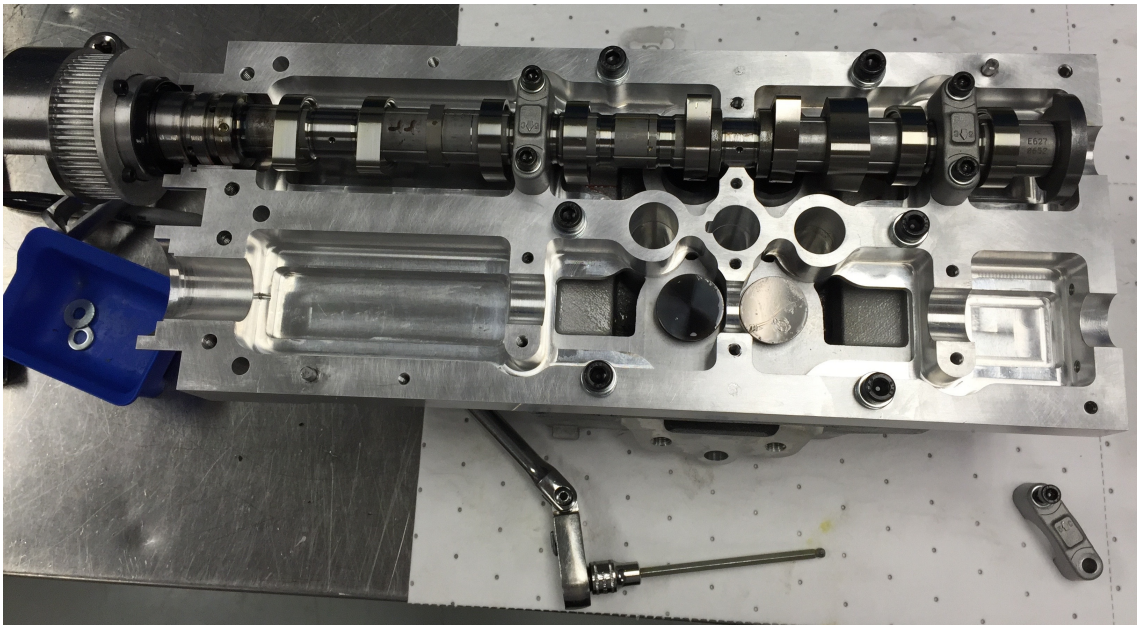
Set-up for adjusting proper valve lash prior using lower camshaft carrier and conventional camshaft journal caps, prior to installing and sealing the upper camshaft carrier.
